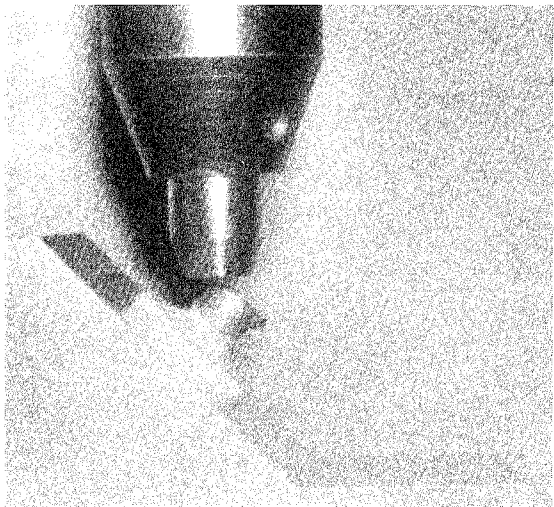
Specimen mounted at 45° angle in Instron Testing Machine
